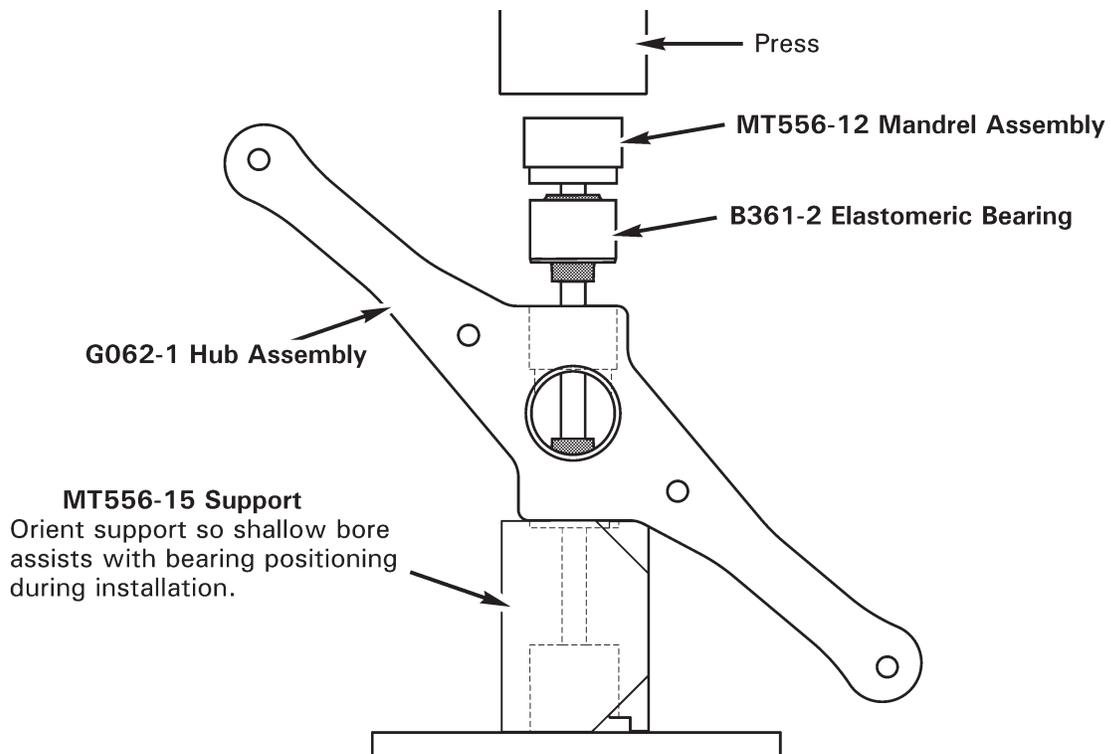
ELASTOMERIC BEARING INSTALLATION
